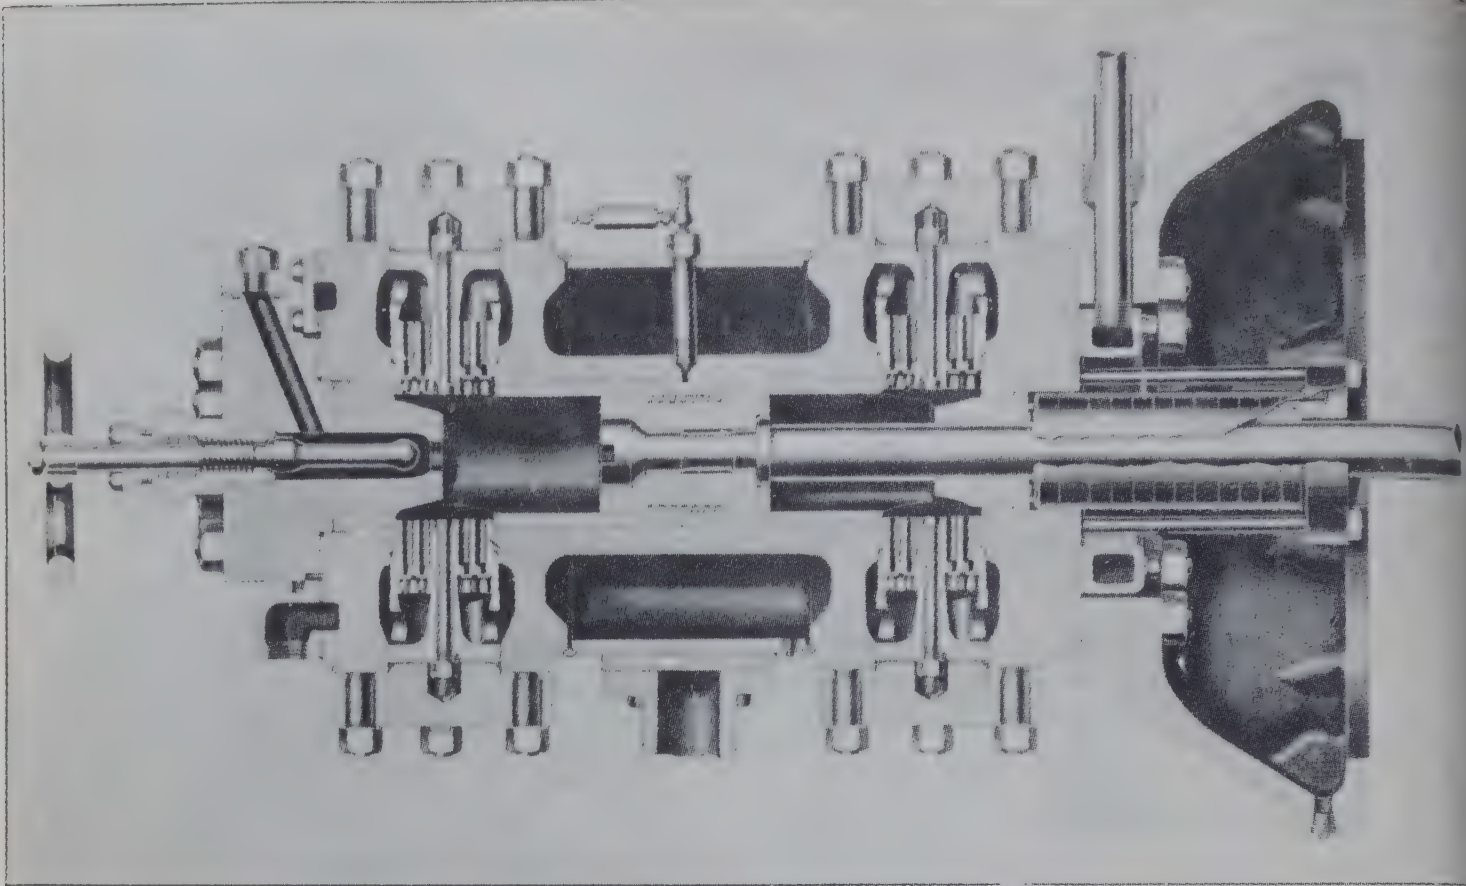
Cutaway view of compressor cylinder for pressures up to 4500 psi. (Cooper-Bessemer Corp.)
